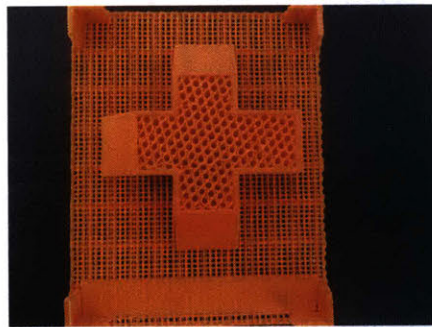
Cross-sectional view of column with a 35%, Honeycomb infill structure
